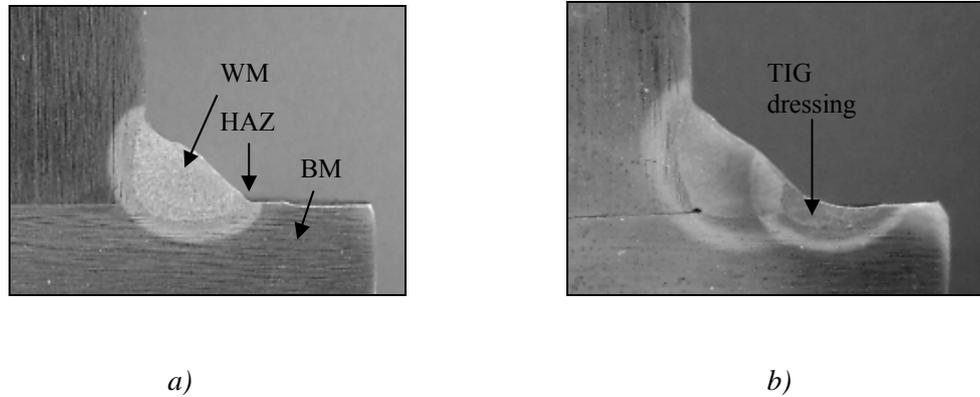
Macrosections of welded joints: a) as-welded; b) TIG dressed
